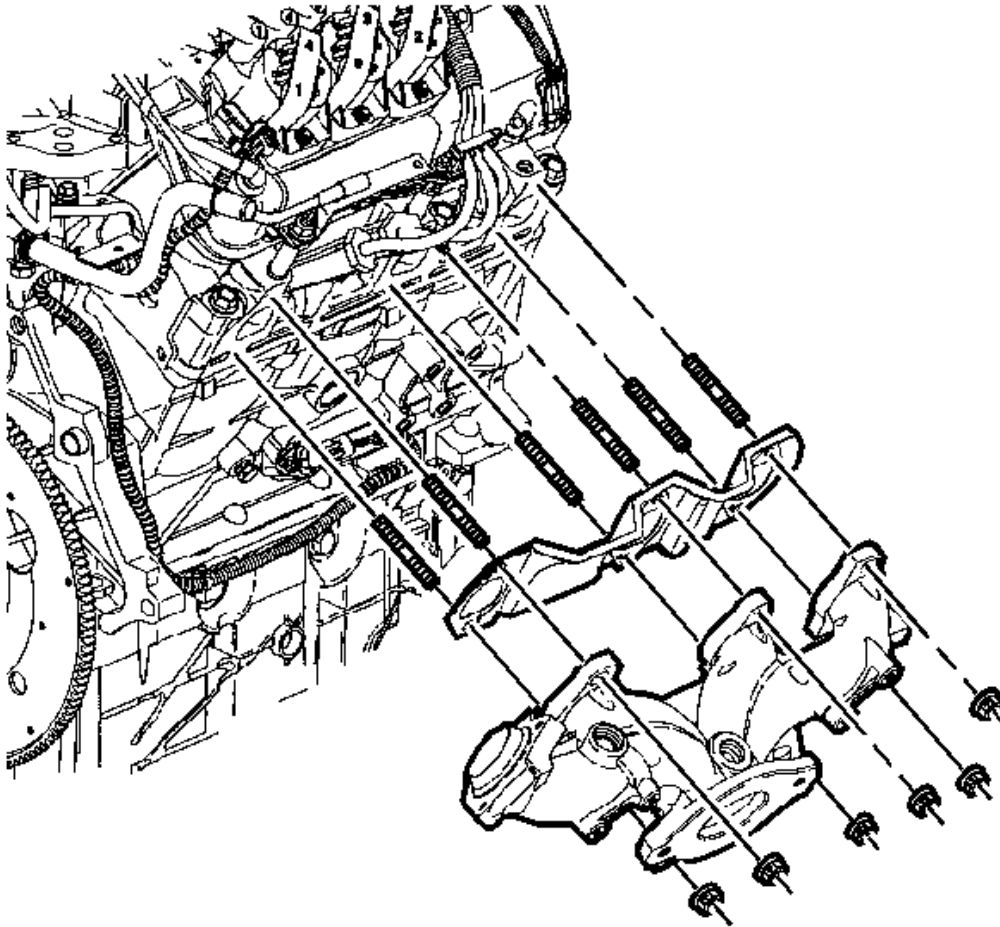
View Of Right Exhaust Manifold & Nuts (3.4L)
